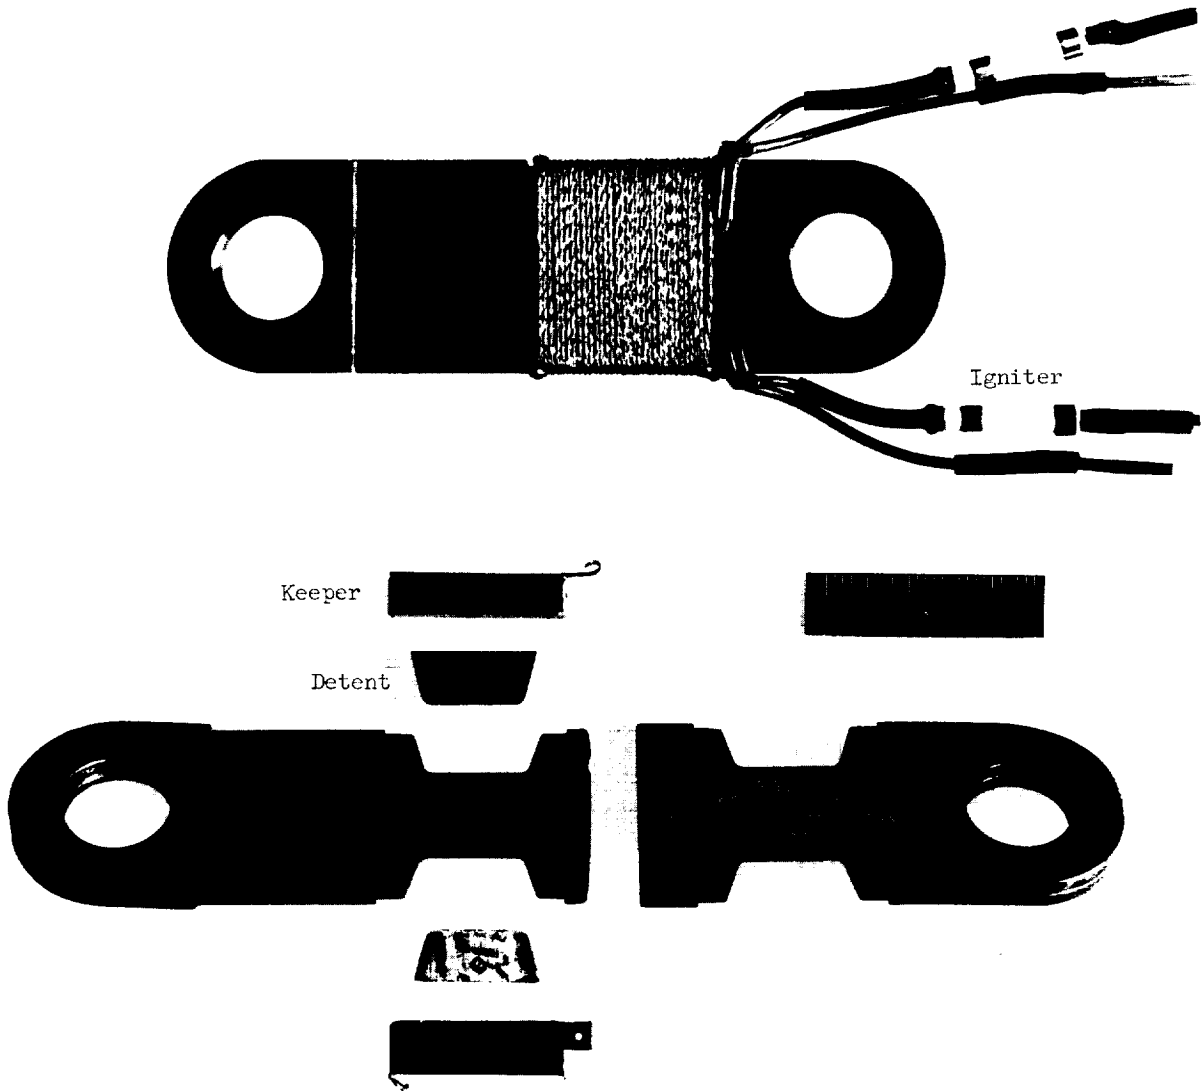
Photographs of assembled heat-shield ejection link and parts.
